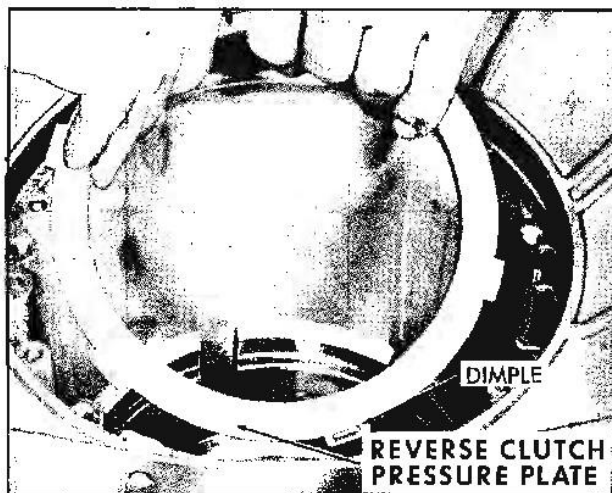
B-123 Installing Reverse Clutch Pressure Plate
